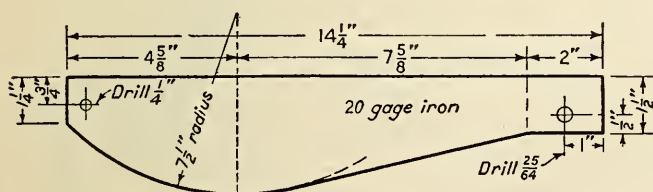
Lower special stripper, Case-Osborne corn binder
